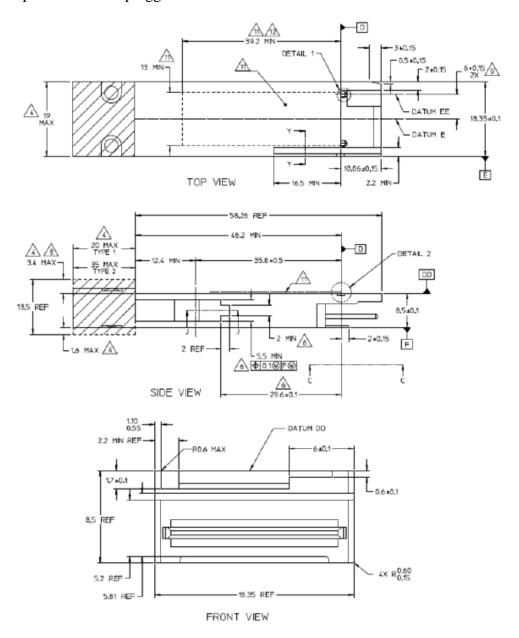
FTCD4313E3PxL Mechanical Dimensions.
